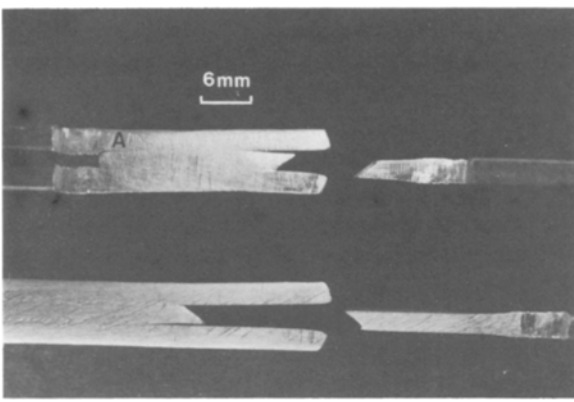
Parent metal fractures in double overlap Type 2 diffusion-bonded test pieces.
